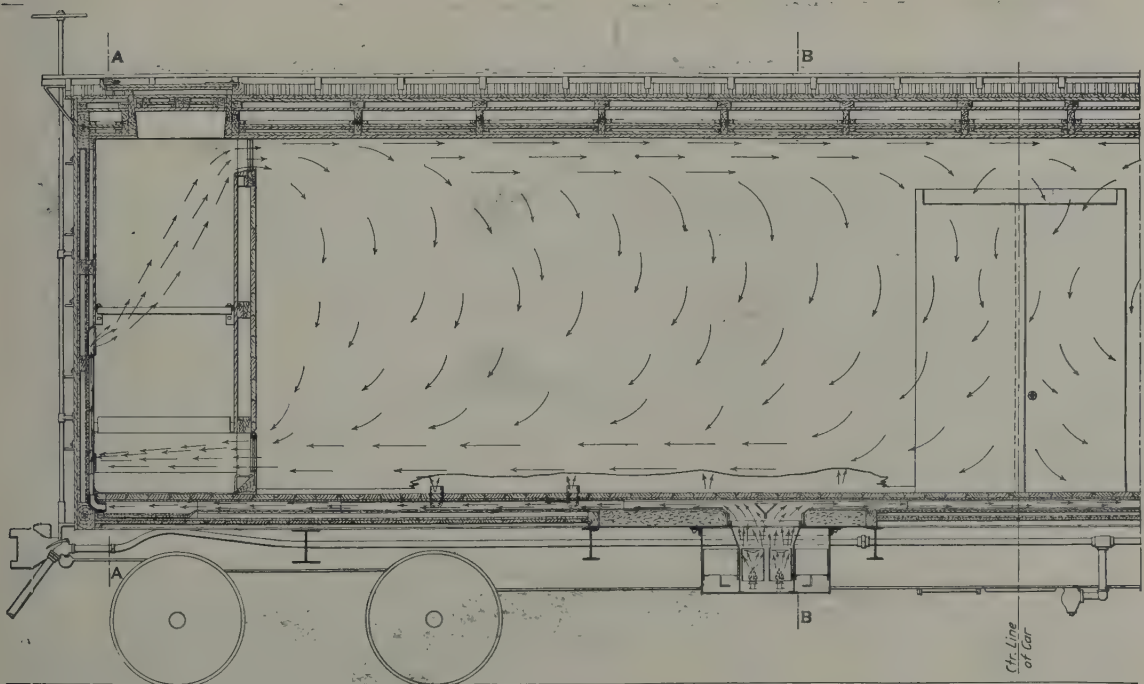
Section Through Refrigerator Car Equipped with the Alcohol Heating & Lighting Company's Heating System, Showing Location of Heater and Passages, and Flow of Air Currents.
